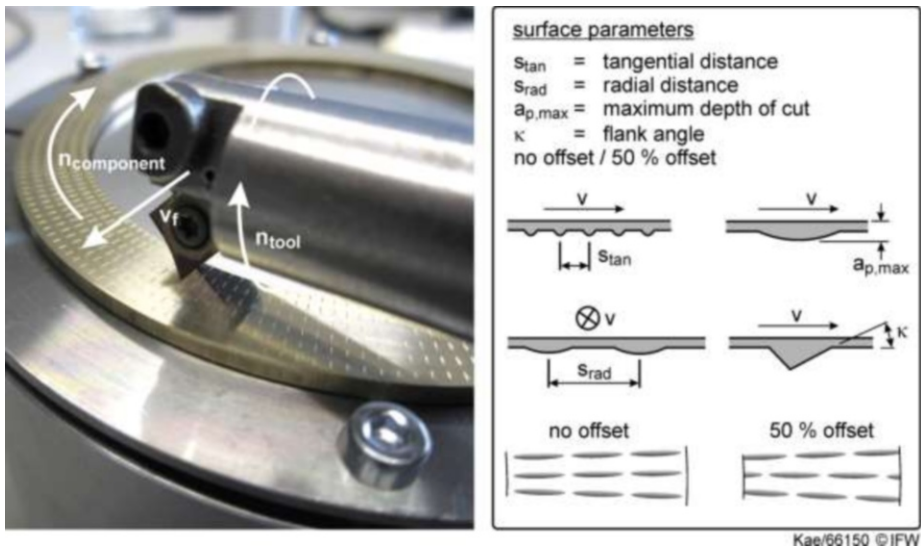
Machining strategy for the axial bearing rings and surface parameters relevant for the ring-on-disc tribometer tests
